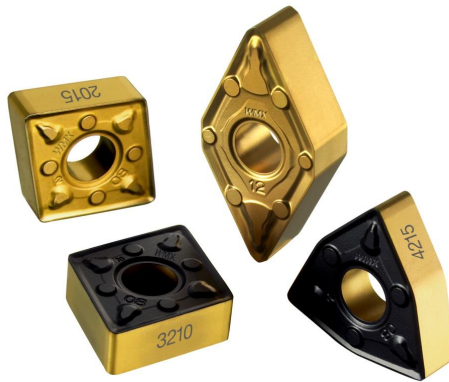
Different shapes of indexable inserts which can be screwed onto a tool holder [1]
